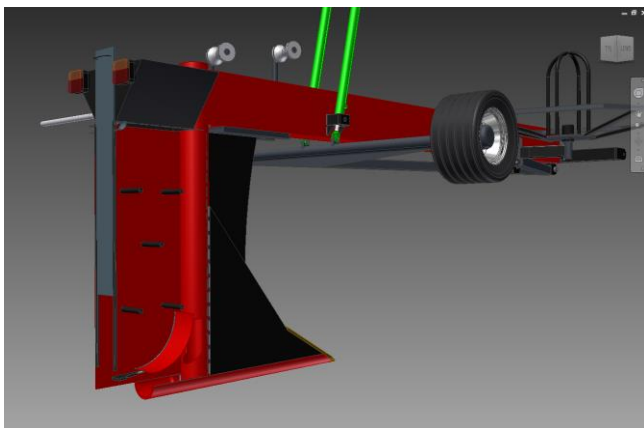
Machine in the working position with the exposed container for the filter material [5]
